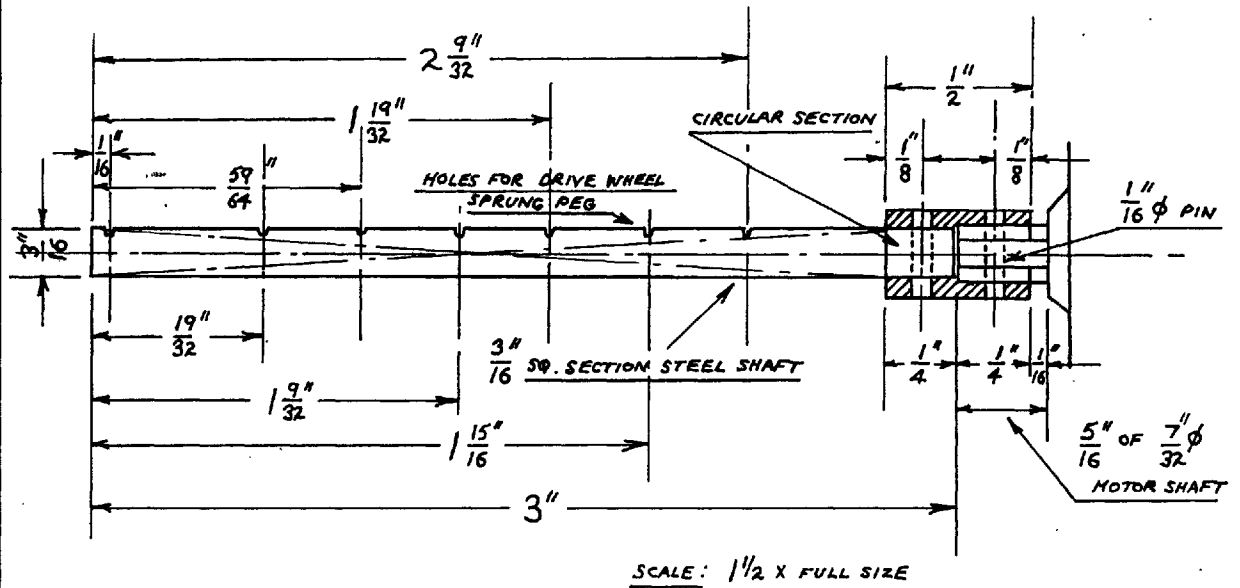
MOTOR DRIVE FOR PICTURE TRANSFORMER
